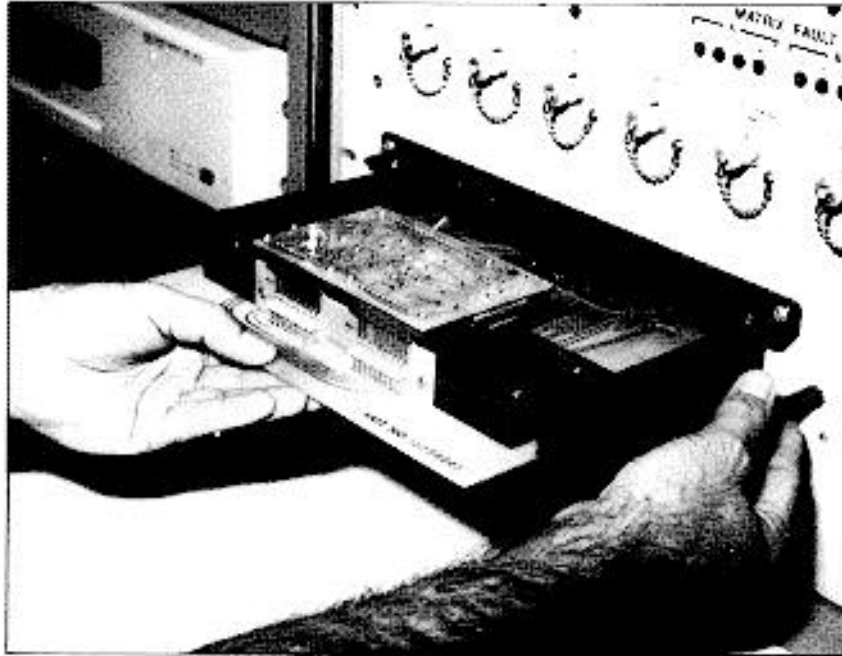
Inserting IAB/PCB/Module in ZIF Connector
